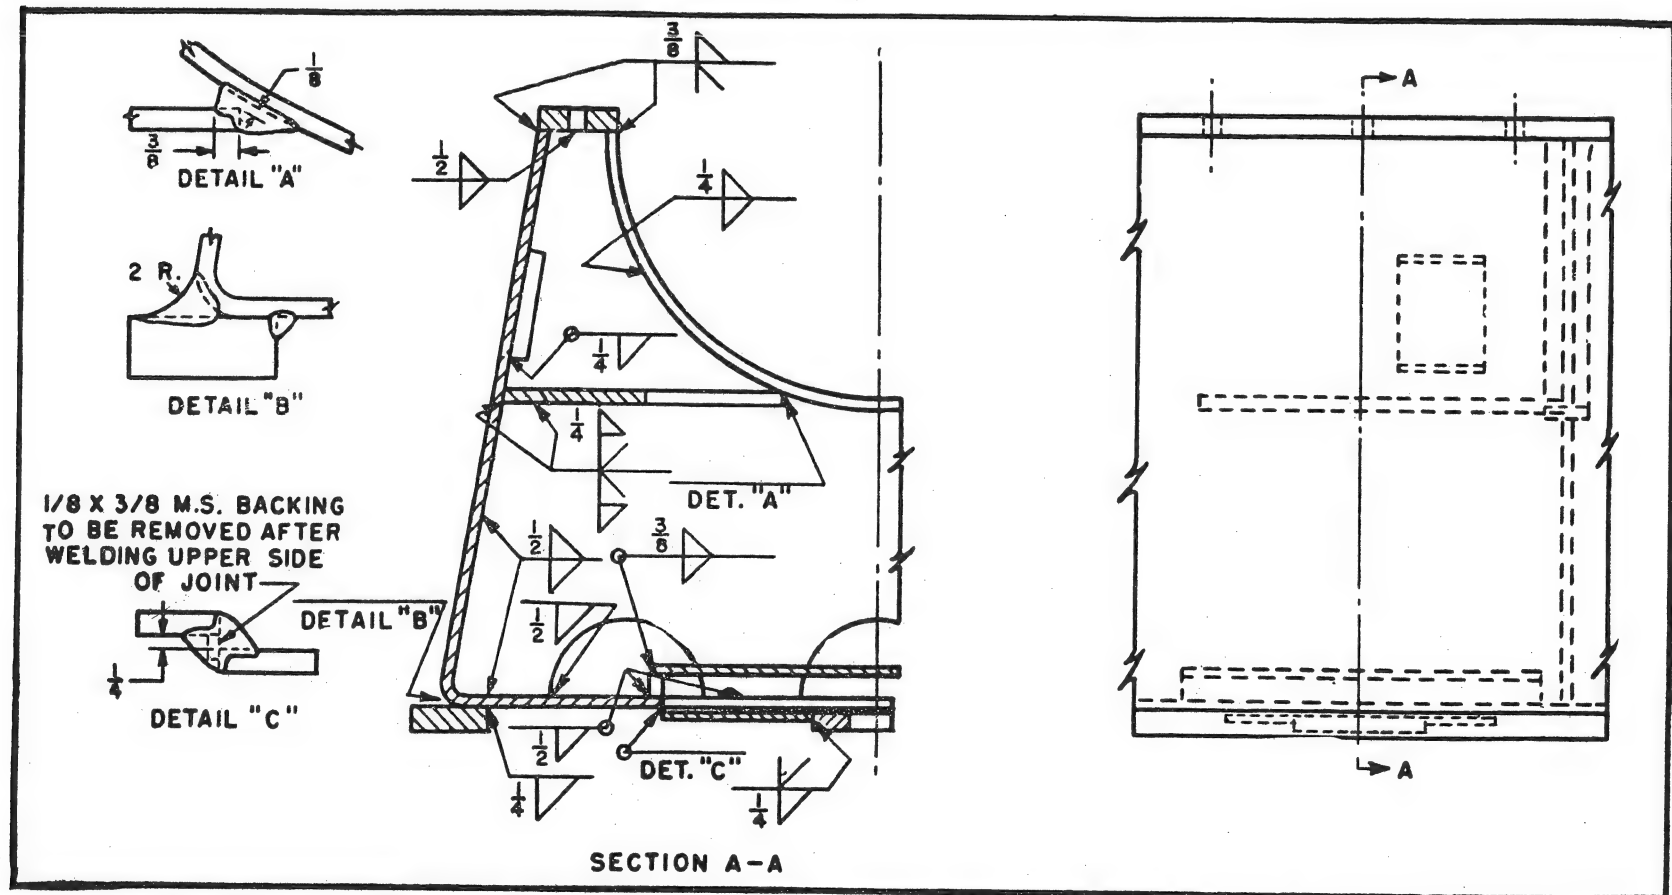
Use of Arc and Gas Welding Symbols on Machinery Drawing
